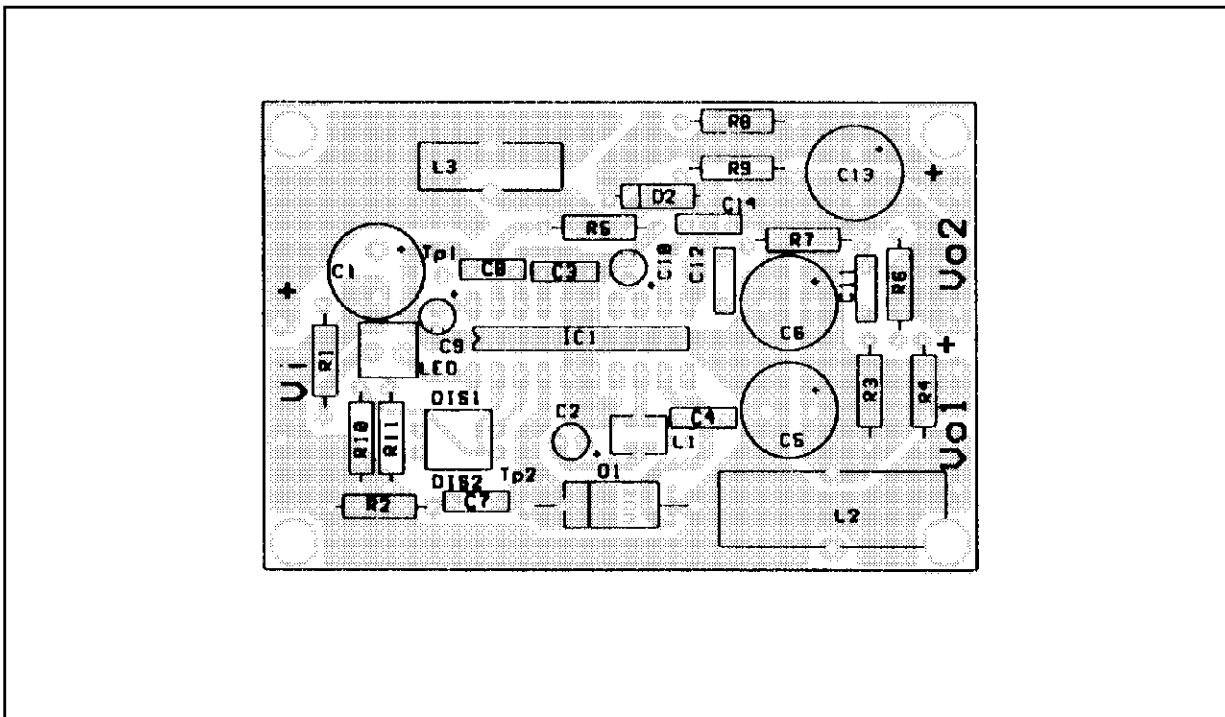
PC Board (Component Side) and Components Layout of fig. 25 (scale 1:1)Figure 27: PC Board (Back Side) and Components Layout of fig. 25 (scale 1:1)
